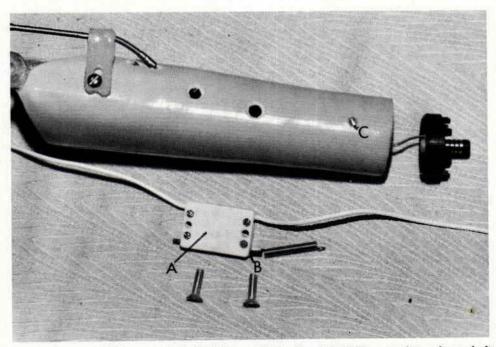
Disassembled forearm A) Variety Village 12700 pull switch; B) New opening and cam shaft extension with spring attached.
